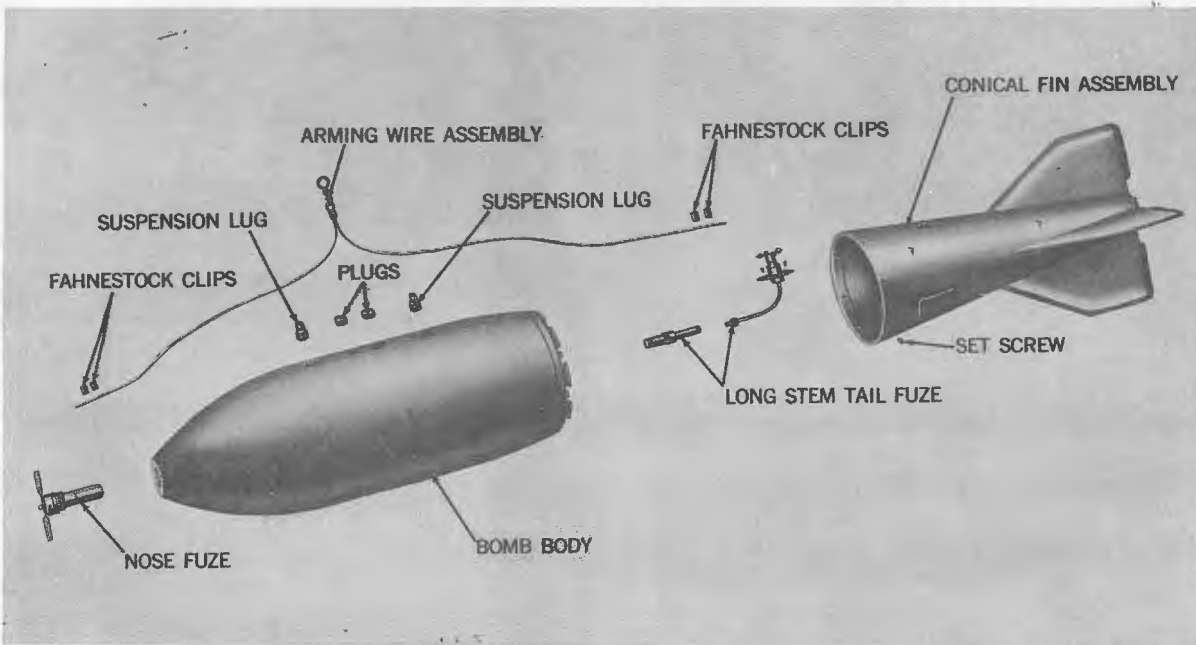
750-lb Demolition Bomb M117 (Mechanically Fuzed), Exploded View.
